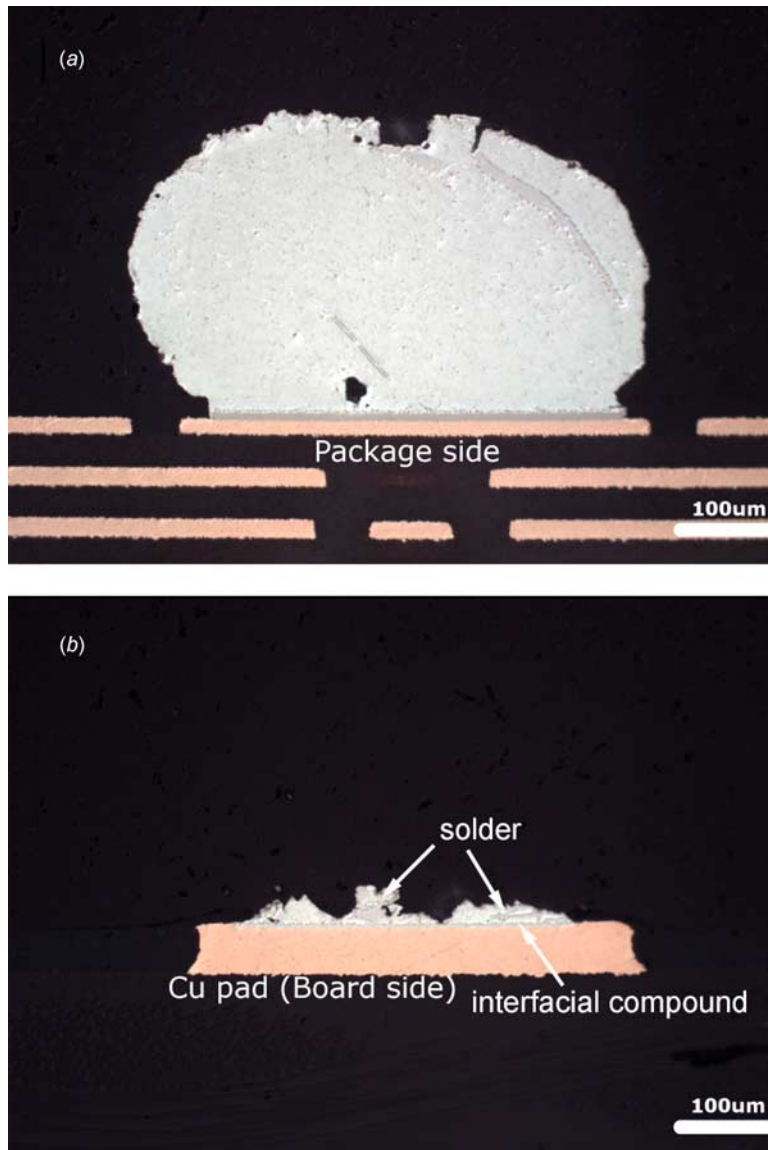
Failure occurs along the path of (solder/IMC + solder matrix) at board side under the loading mixity of  $30^\circ$ : (a) Solder joint at package side; (b) residue Cu pad at board side.
